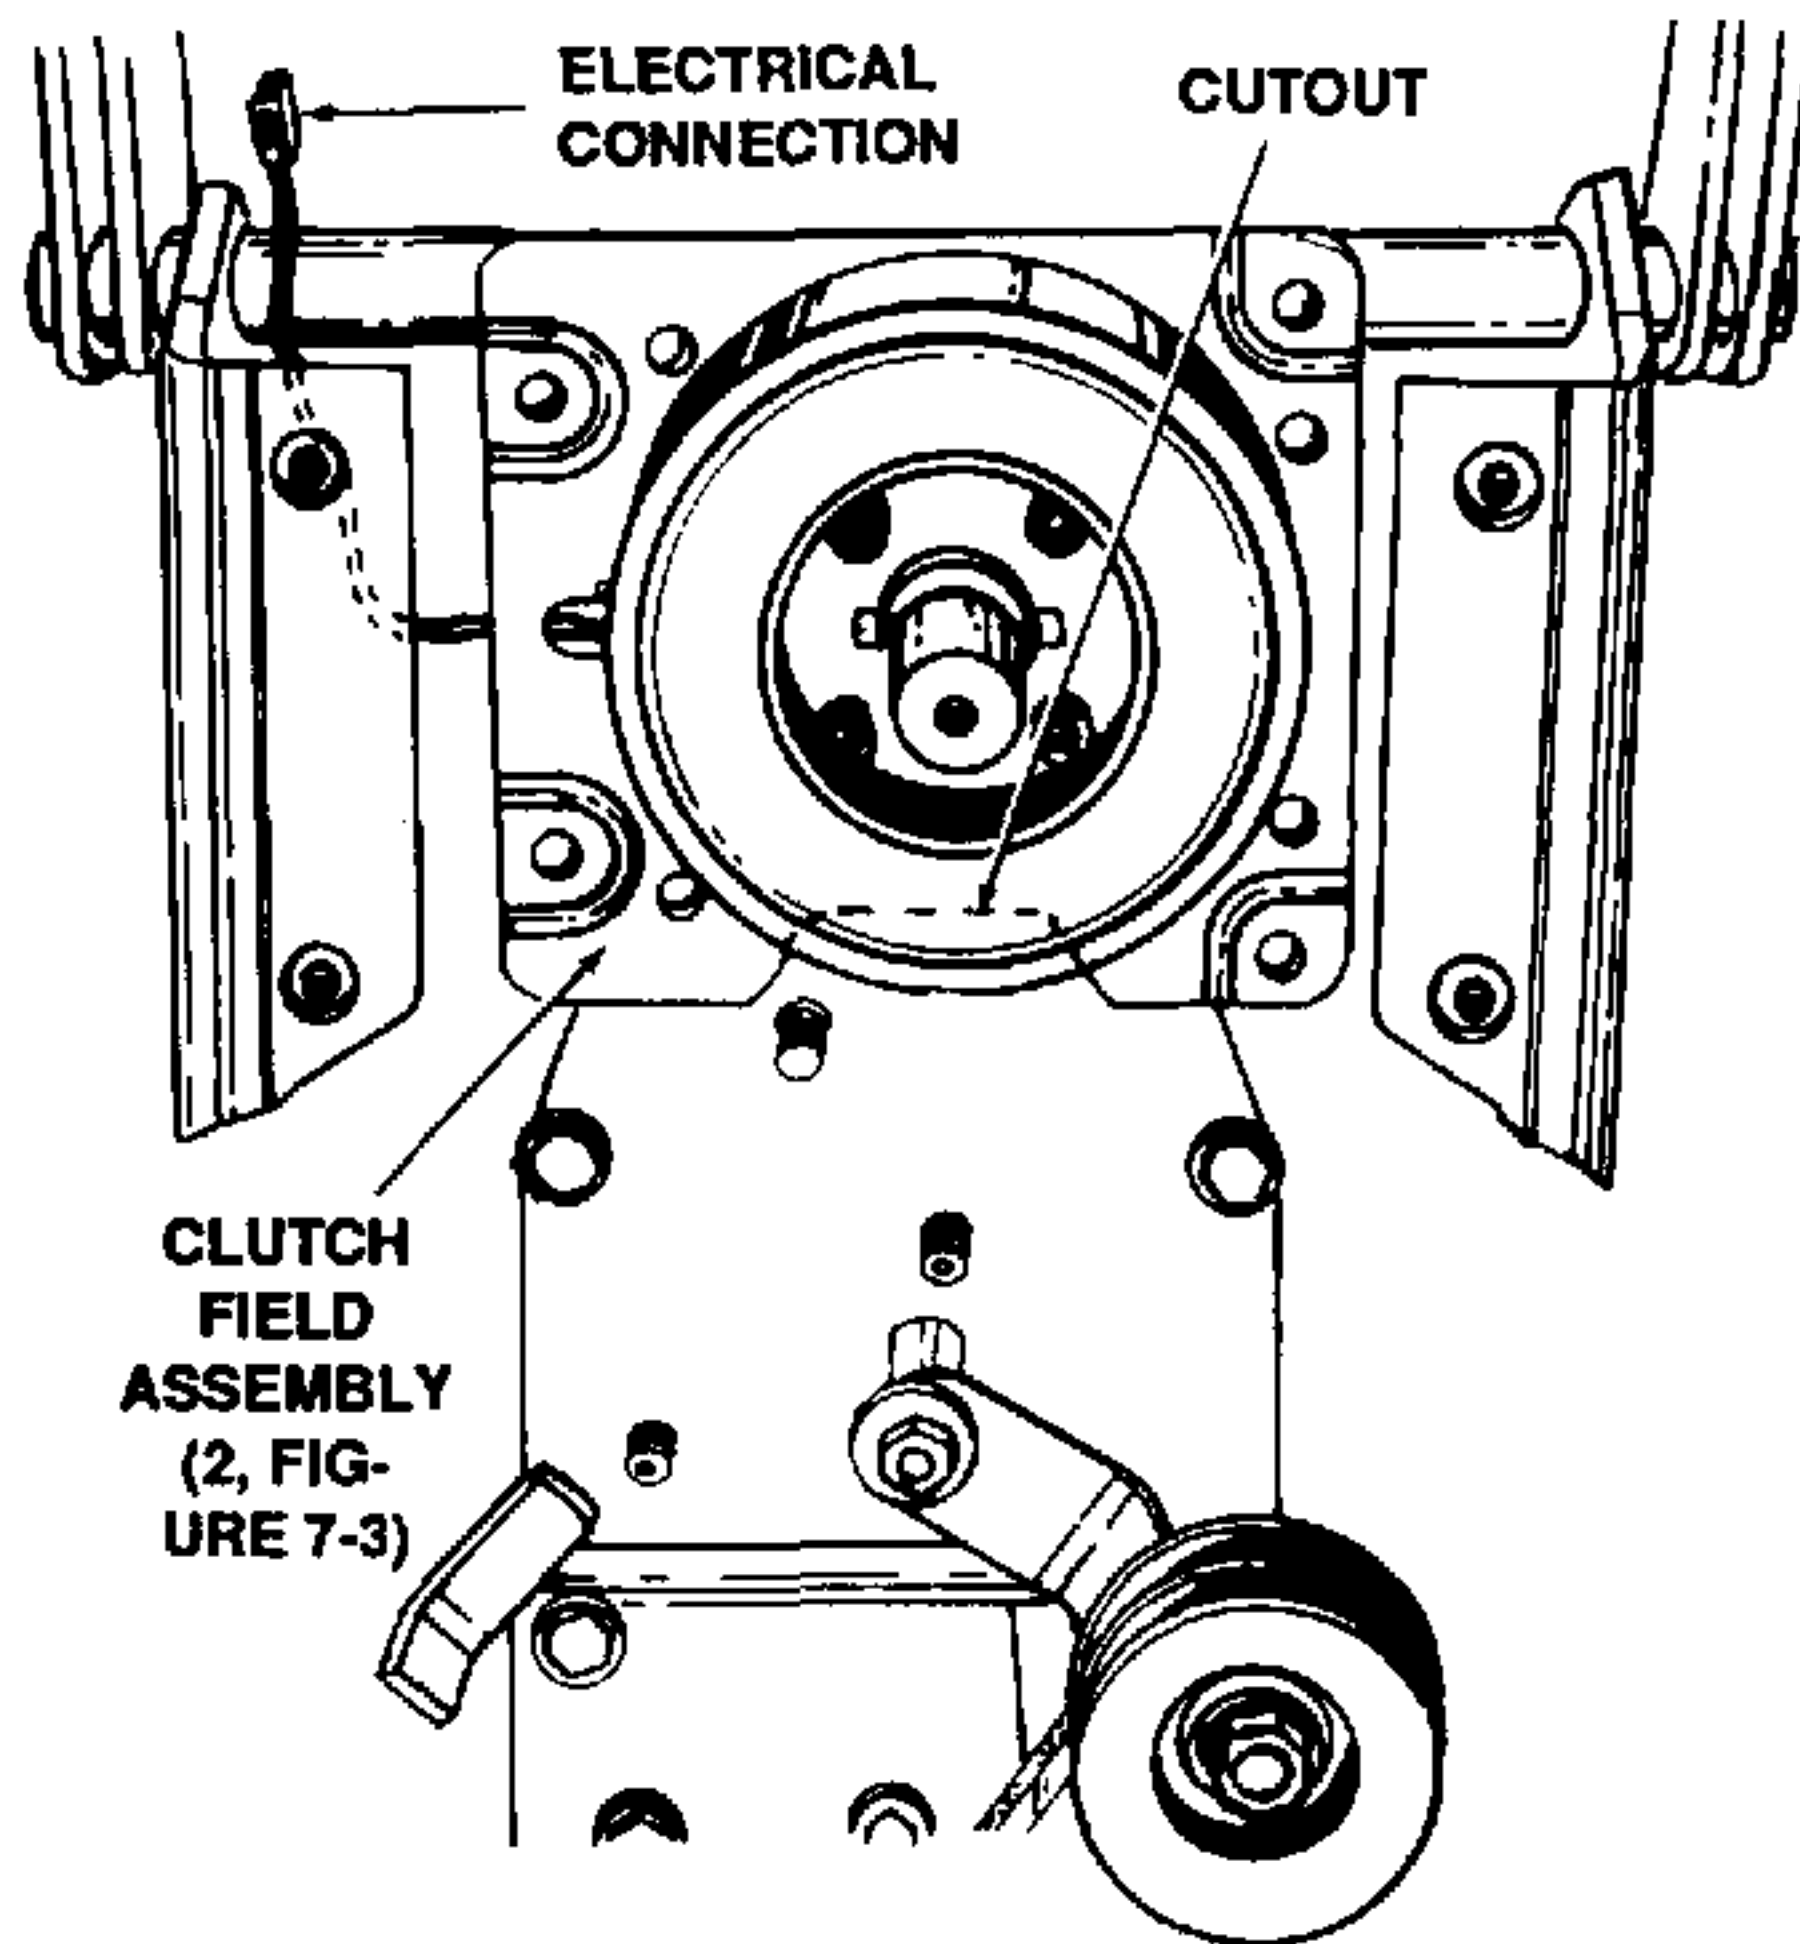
Installing Clutch Field Assembly on Rear PTO Clutch Shaft.
